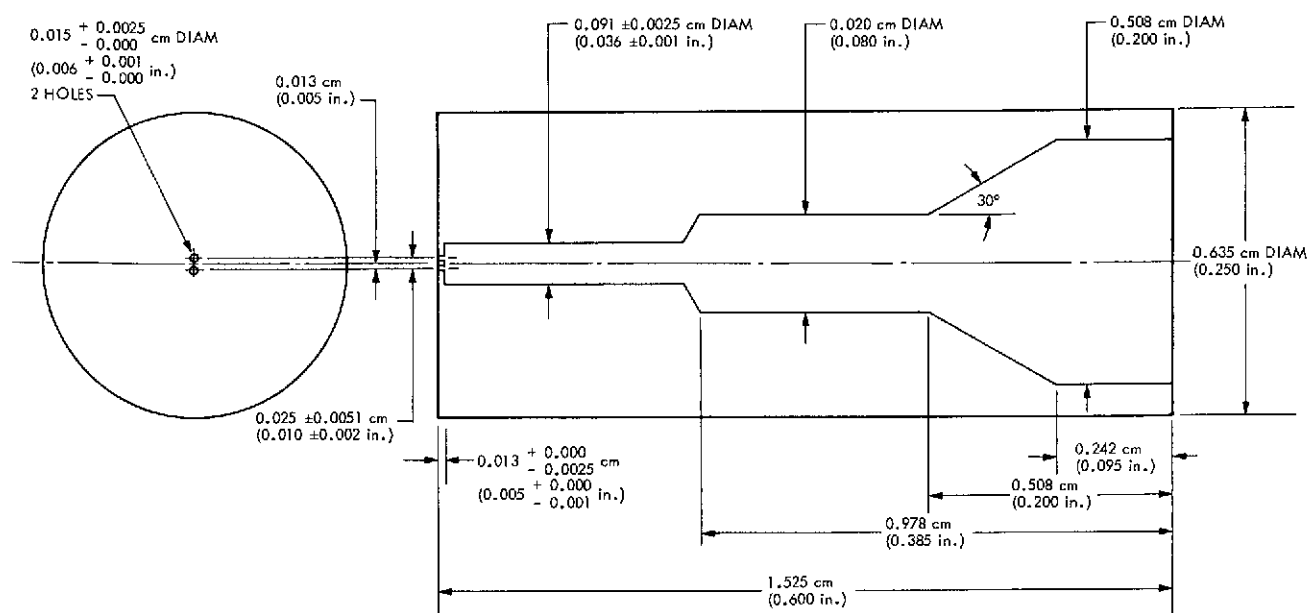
Machined thermocouple plug body (tellurium copper)
